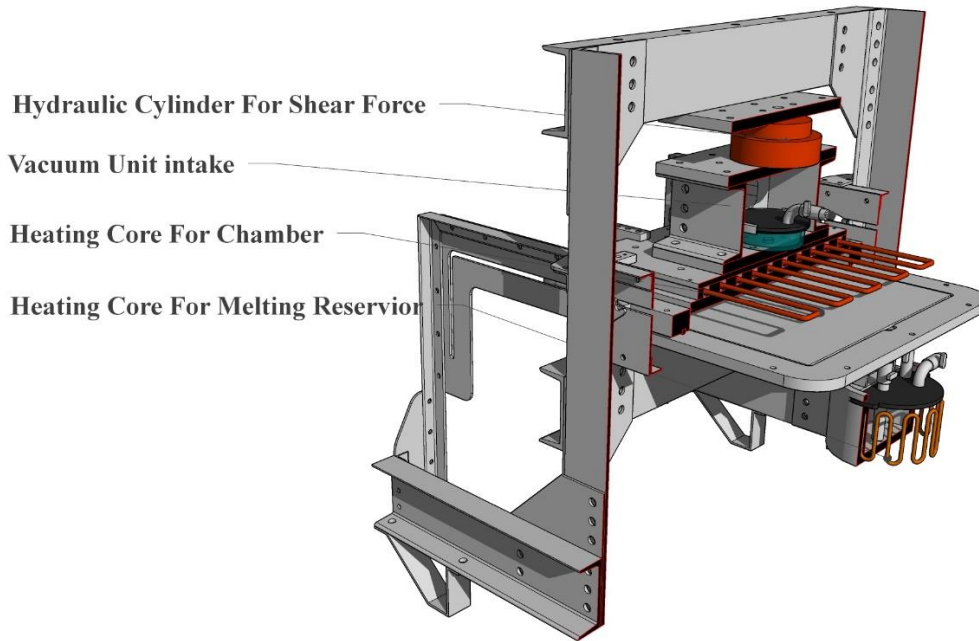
Drawing in perspective, machine equipped with thermal core, hydraulic cylinder and vacuum unit
